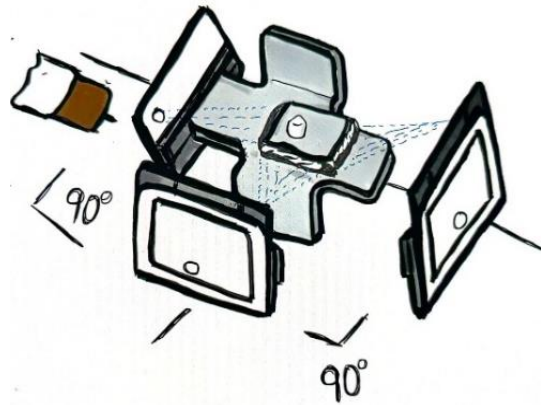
Image acquisition of the welded parts. Note how the capturing device is arranged in three different positions to acquire a good view of the weld seams.
